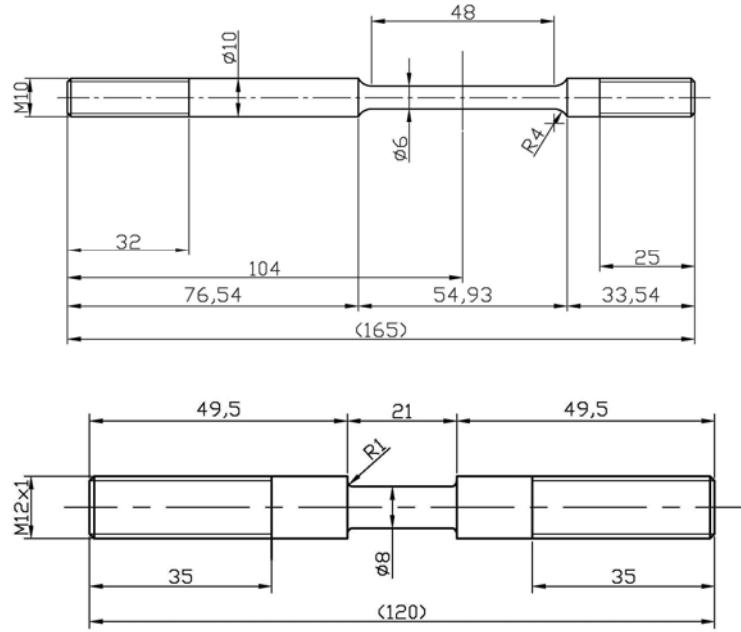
Drawing of the two specimen geometries for tensile samples (top) and tension/compression samples (bottom). All dimensions in millimeter. Compression only samples can be cylinders up to 12 mm diameter.
